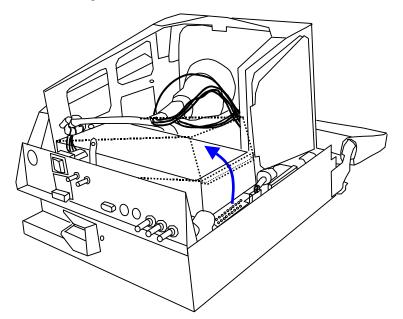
1-14. Disconnecting the power supply connector on the Motherboard
